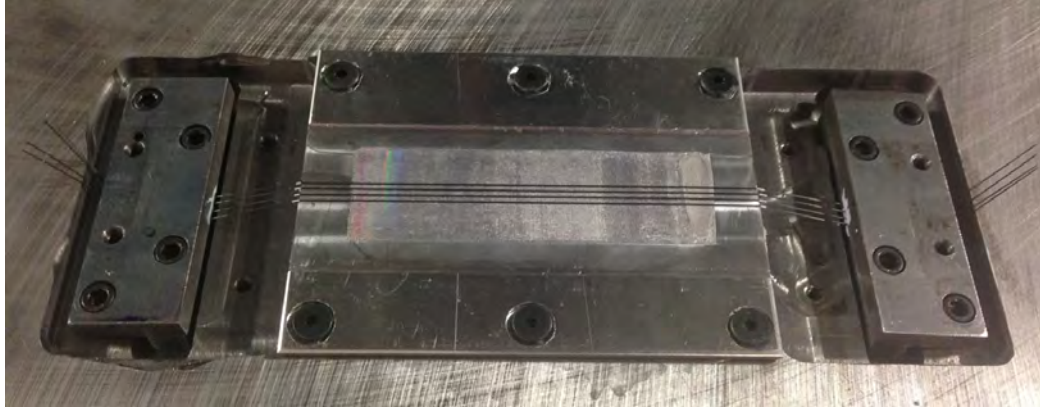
Production of coupon-sized sample before welding pass with ribbons lying on structure surface.
